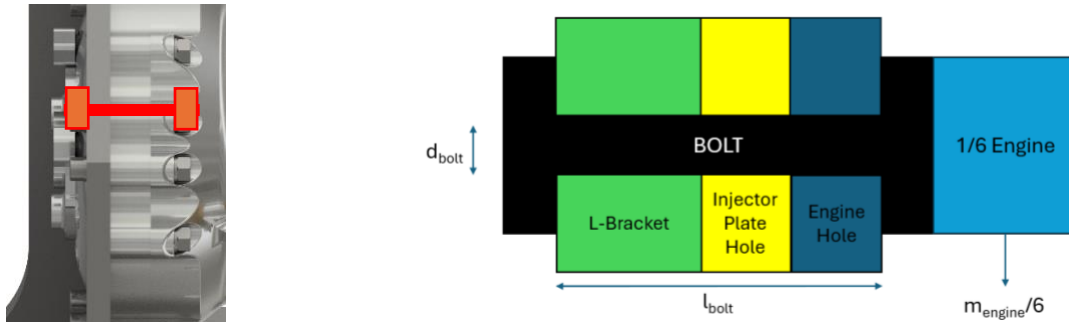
Bolt location highlighted on CAD (left). Schematic to describe assemble around bolt (right).
